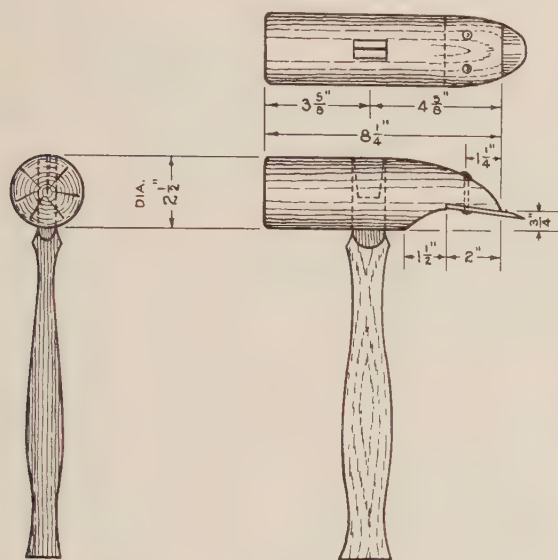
Planting mallet. The head is made of seasoned ash. The handle is a standard 14-inch carpenter's claw hammer handle. The blade is a standard fire rake or mowing machine blade.
